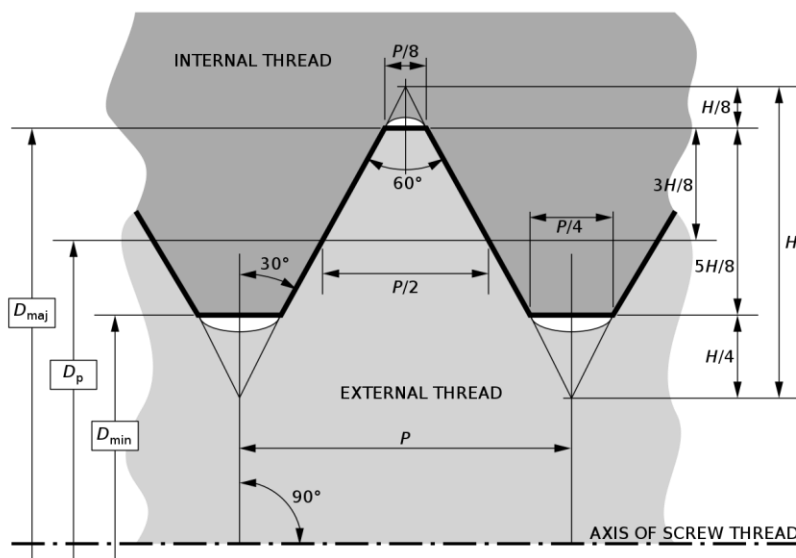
ISO, DIN, AS, JIS thread dimensions
